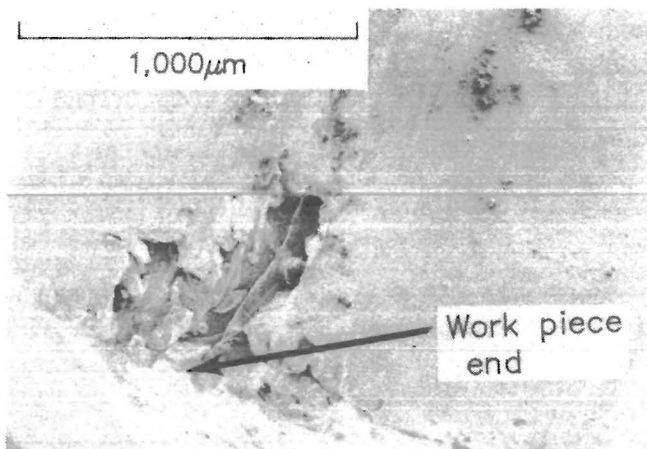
Brittle fracture at end of machining pass on machined face of specimen, dry cut, 13.6 scmps.
